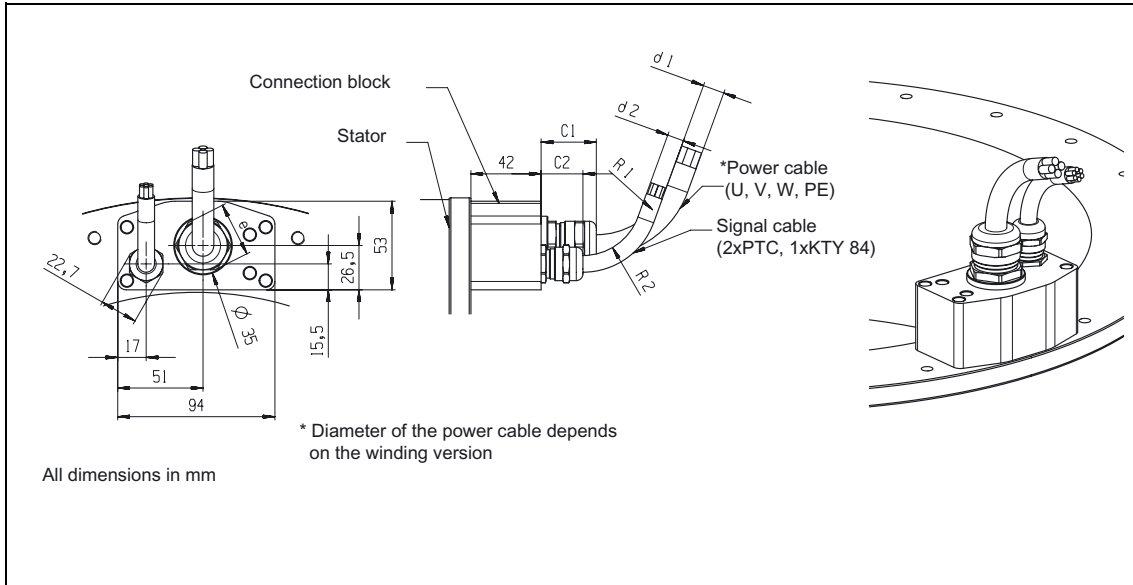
Axial electrical connection with gland for 1FW6160, 1FW6190 and 1FW6230 (motor type A)
